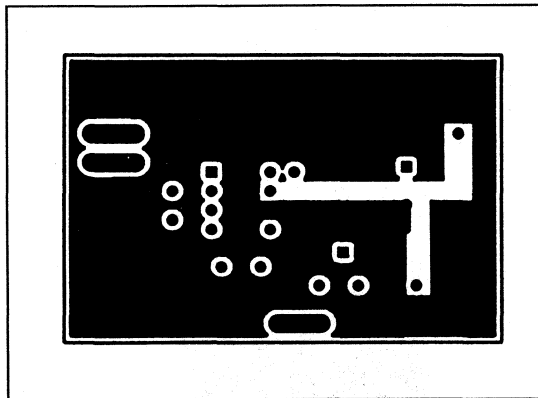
DIP PC Layout, Solder Side (1X Scale)
